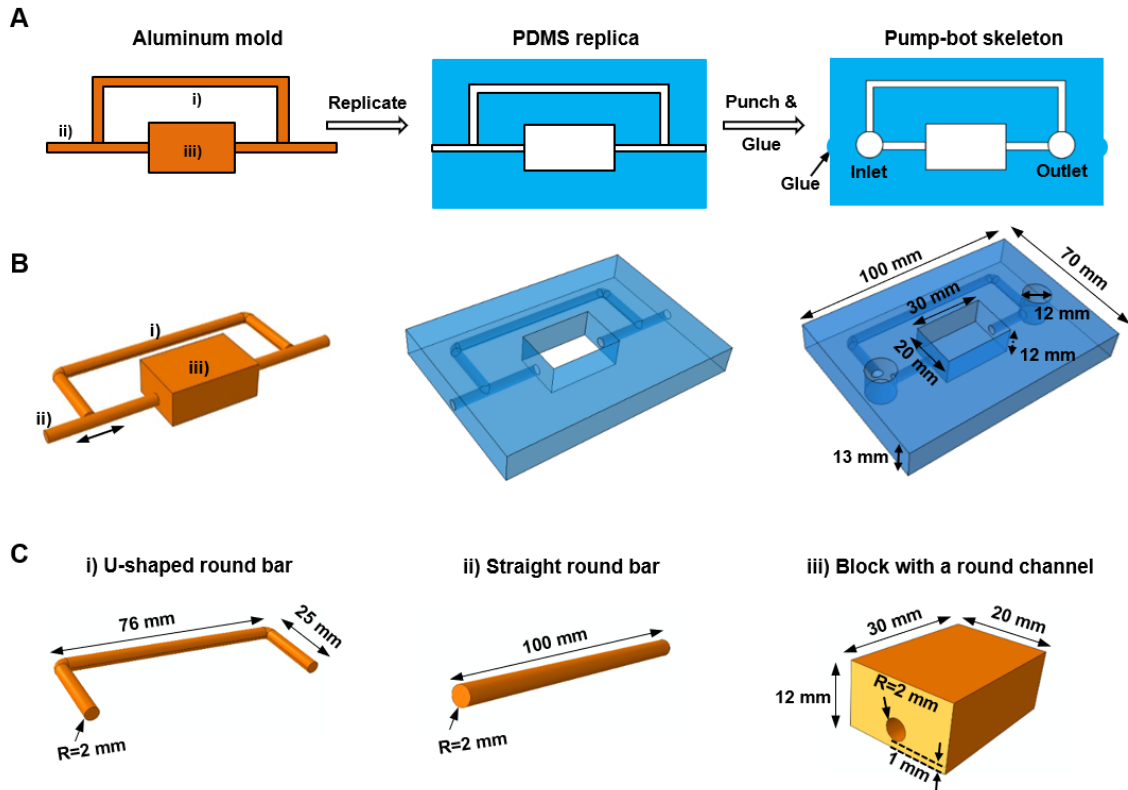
Schematics of the fabrication process for making pump-bot skeleton with dimensions shown in two dimensional (*A*) and three dimensional (*B*) forms respectively. (*C*) The dimensions of aluminum mold components including U-shaped round bar (i), straight round bar (ii) and one block with a round channel inside (iii).
